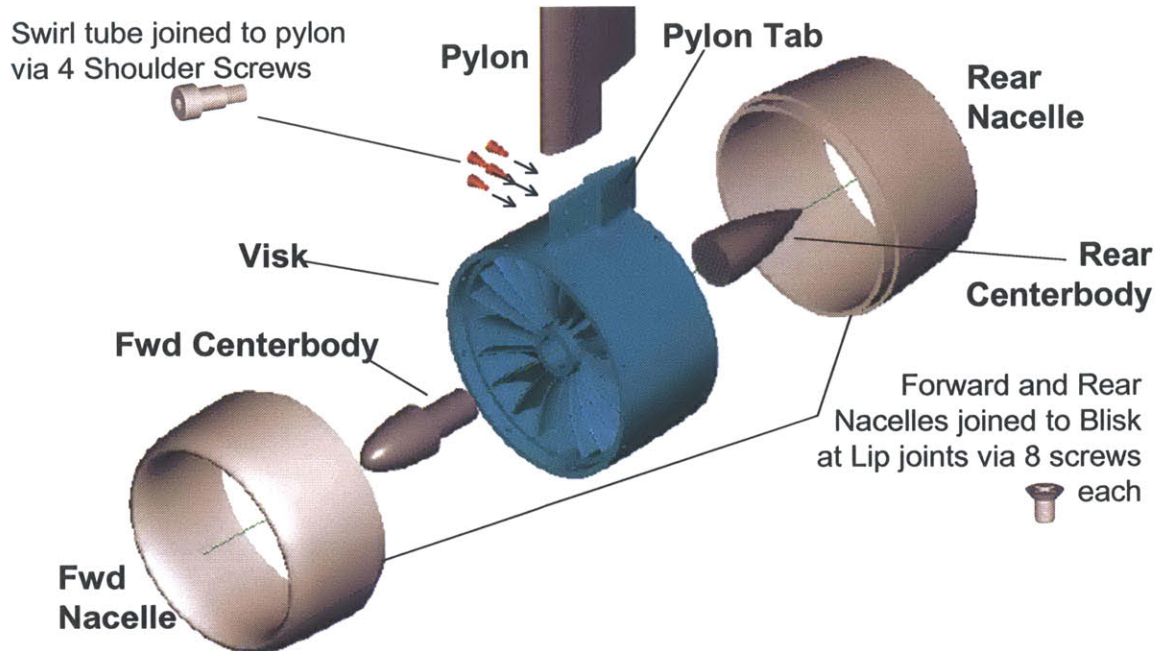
Exploded view of swirl tube test model assembly. The six components of the modular assembly are depicted with the central visk in blue. Renderings of pylon and nacelle mechanical fasteners are also included.
